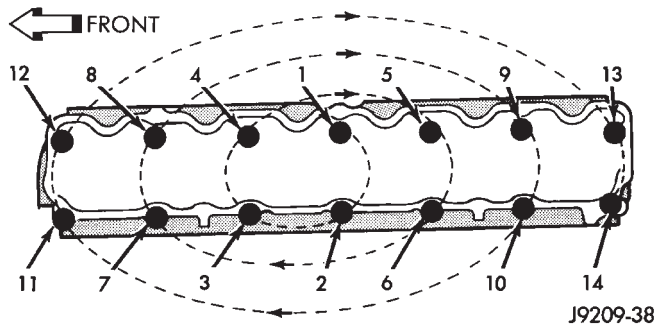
Engine Cylinder Head Bolt Tightening Sequence
